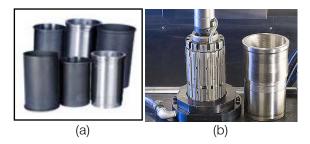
(a) : Photograph of cylinder liner, (b) photograph of honing tool with cylinder liner
